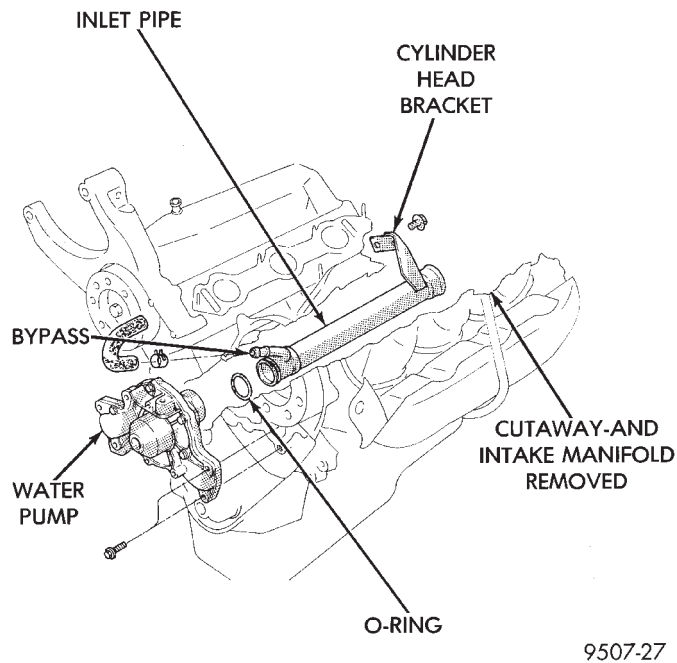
Engine Inlet Coolant Pipes 3.0L Engine
